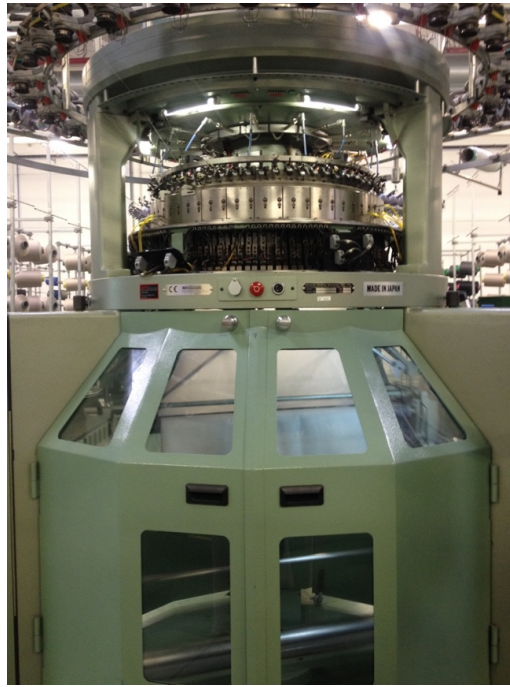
V-LEC6BS Knitting Machine by Monarch Knitting Machinery Ltd. (Courtesy Borgstena Textile Portugal)
